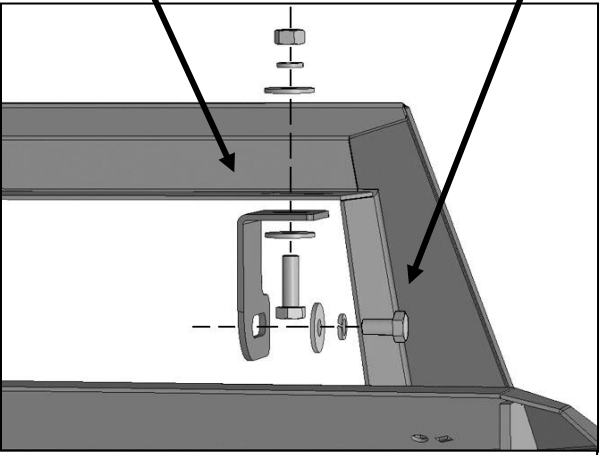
Driver/left side of CS1 Bumper installation illustrated from below
